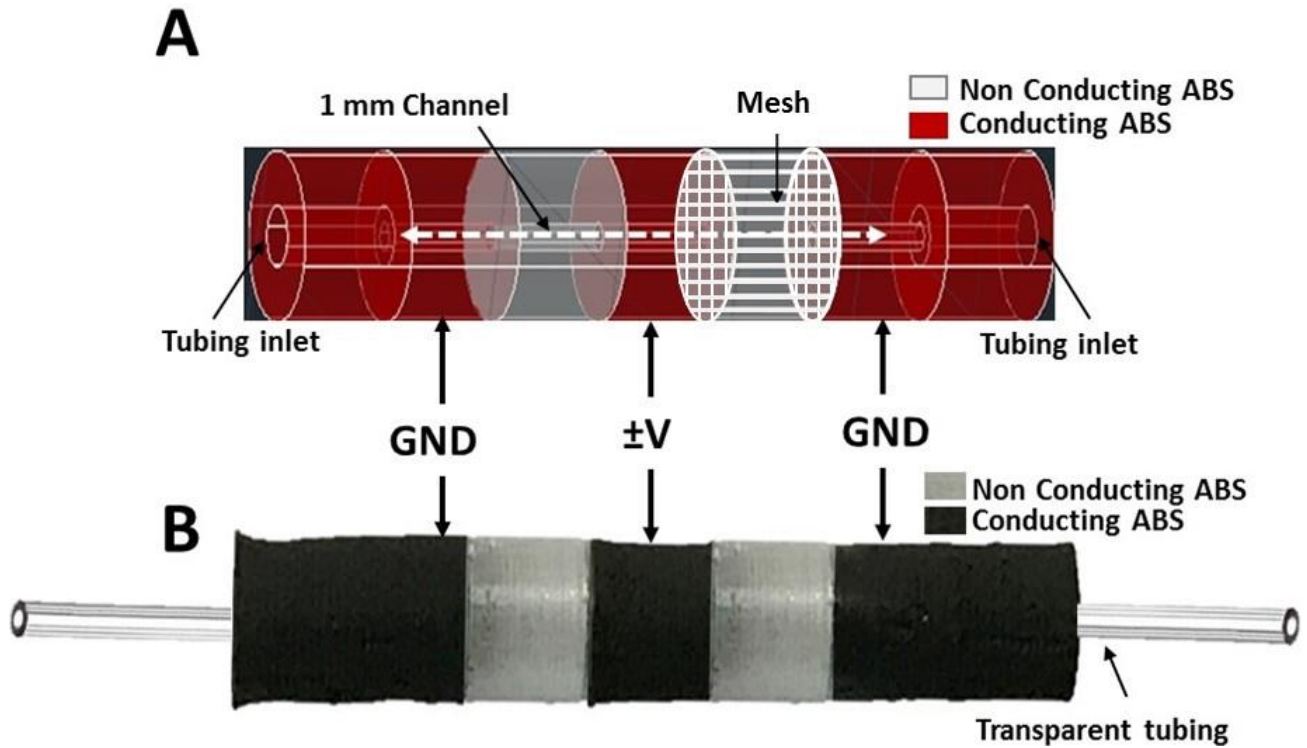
(a) CAD design of the electroosmotic pump and illustration of its different parts (b) 3D printed
